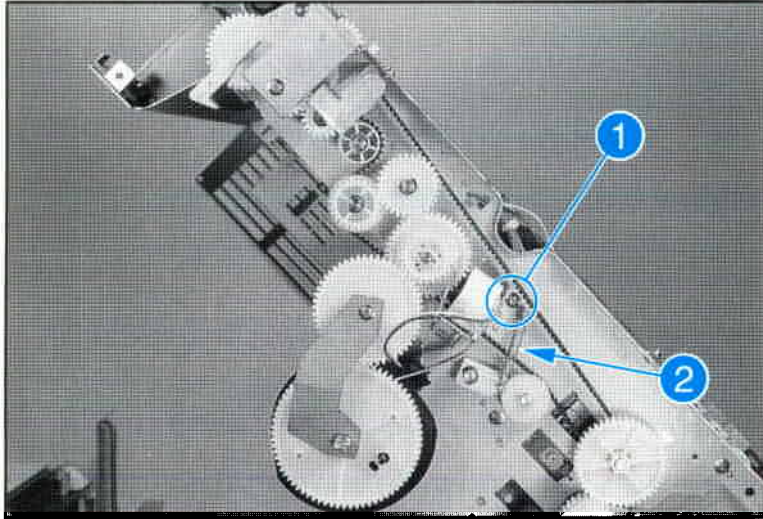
Transfer Cam Solenoid (SL4) Removal
